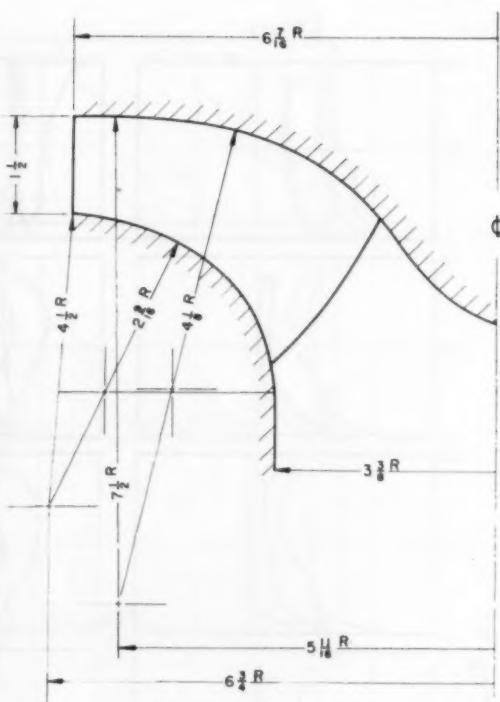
CROSS-SECTION SKETCH OF THREE-DIMENSIONAL IMPELLER
